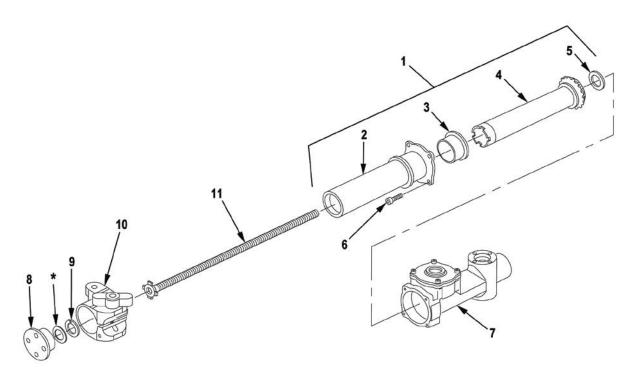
Disassembly of Upper and Lower Mechanical Housings.
